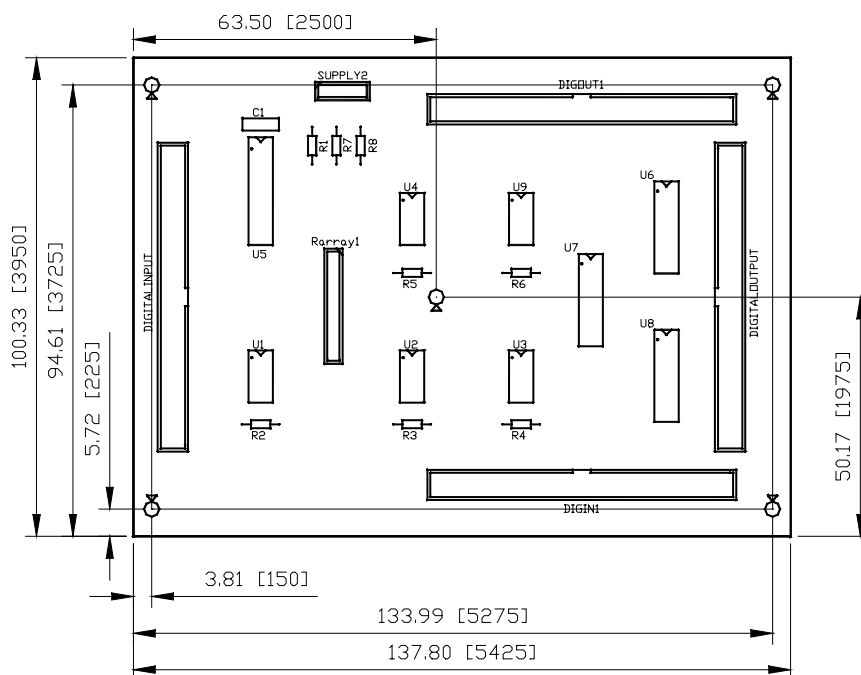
Axis2 Interface Board layout. The measures are in millimeters (mils in brackets).
